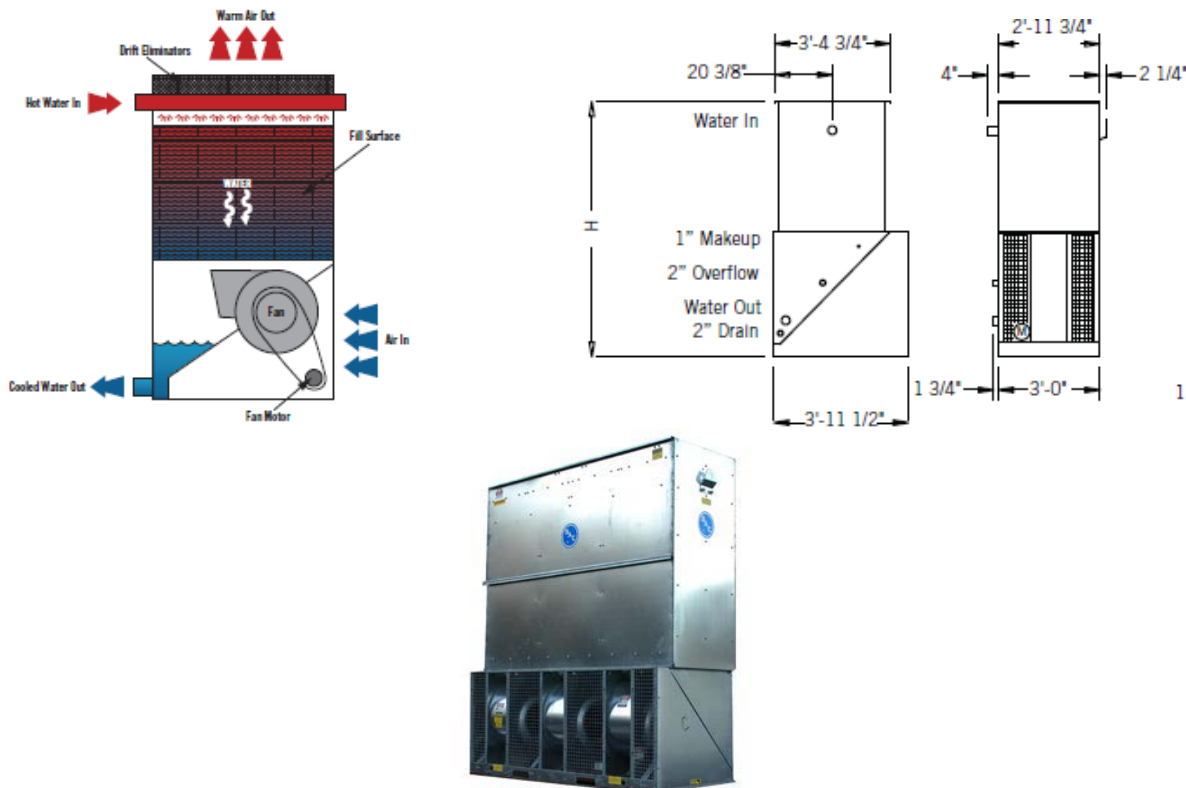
Series V cooling tower VTO-12-E by BAC: schematics, dimensions and photo
